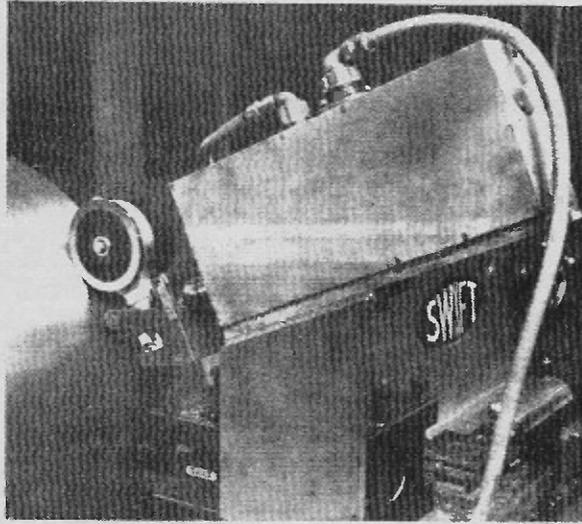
Friction driven diameter measurement of a large shaft in a lathe (Rotax Ltd).
